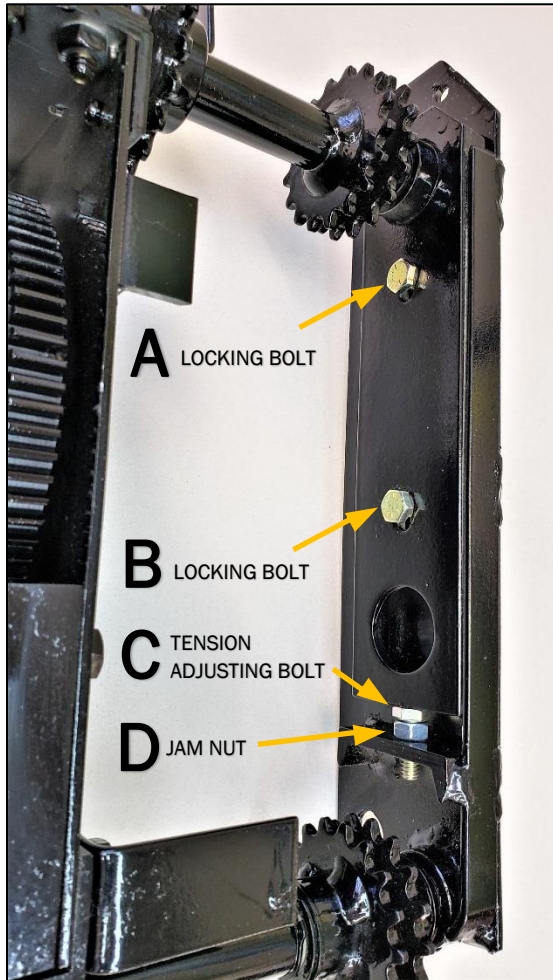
LIFTING CHAIN ADJUSTING CHANNEL
